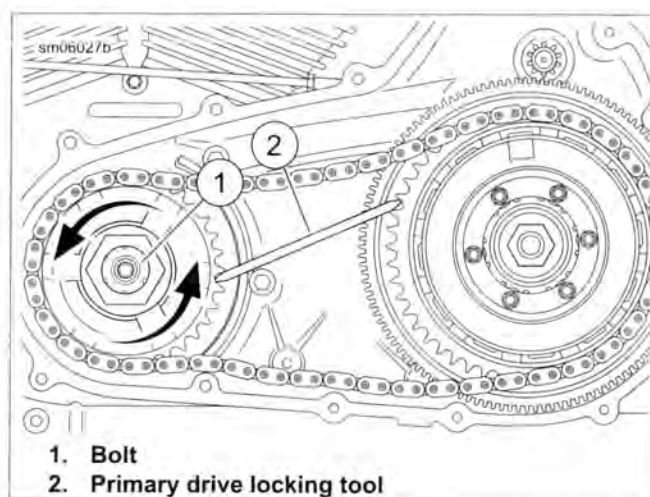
Removing Engine Compensating Sprocket Bolt
